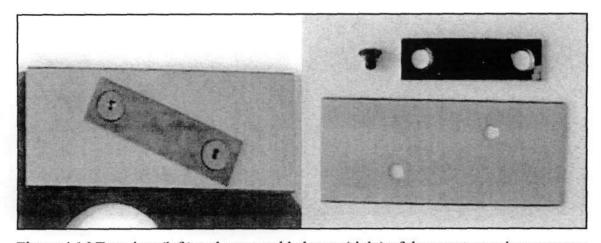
Top view (left) and unassembled state (right) of the counter sunk connectors
